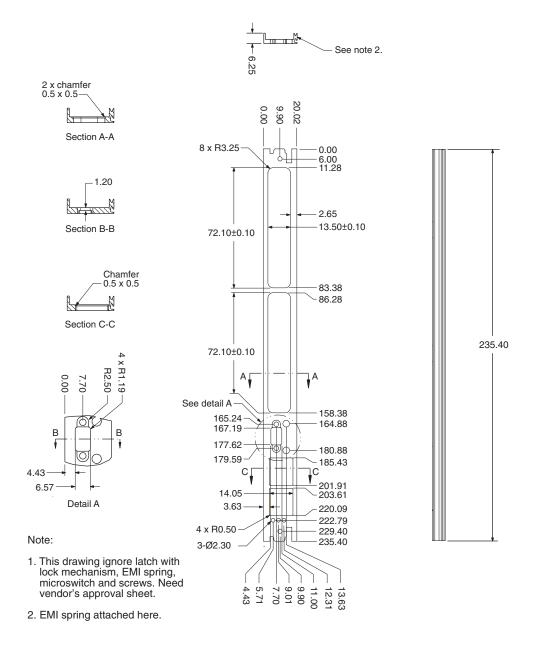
Mechanical Illustration of the Netra CP2160 Board Front Panel
